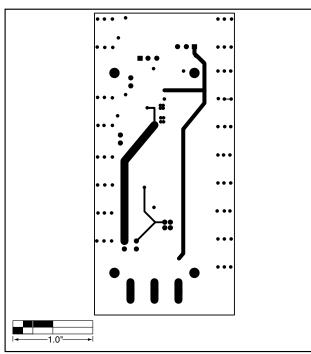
MAX3665 EV Kit PC Board Layout—Power Plane
